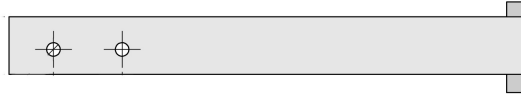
The chosen shape for the cantilever: The holes were made to ensure precise horizontal orientation. They fit onto two pins embedded in one of the two pieces of aluminum that clamp around the cantilever.
